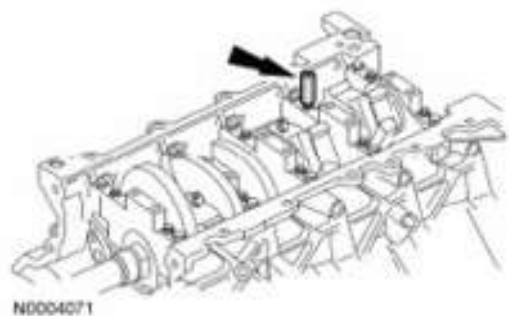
Identifying Main Bearing Caps Bolts In Sequence
